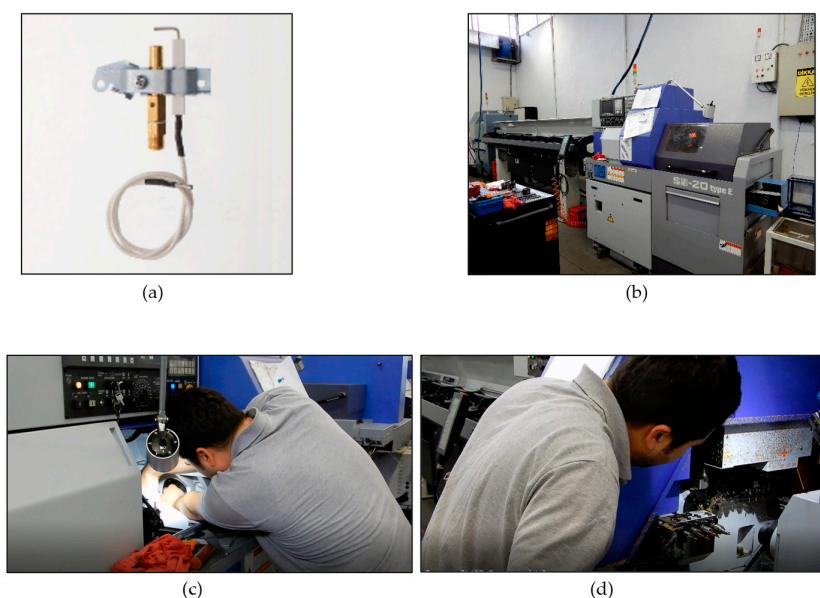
(a) Source gas heater thermocouple pilot group, (b) Swiss-type CNC, (c) checking tool chuck, and (d) counting samples.
